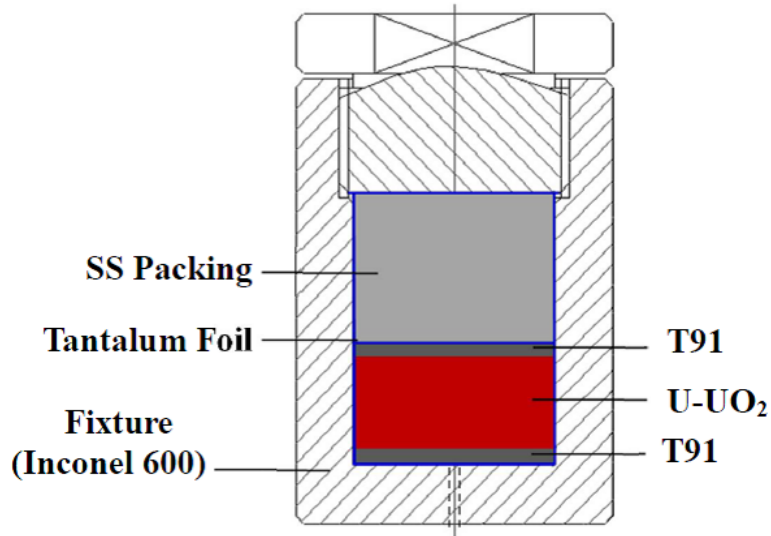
The schematic diagram of the fixture and arrangement of samples inside the fixture. Stainless Steel (SS) was used as packing material.
